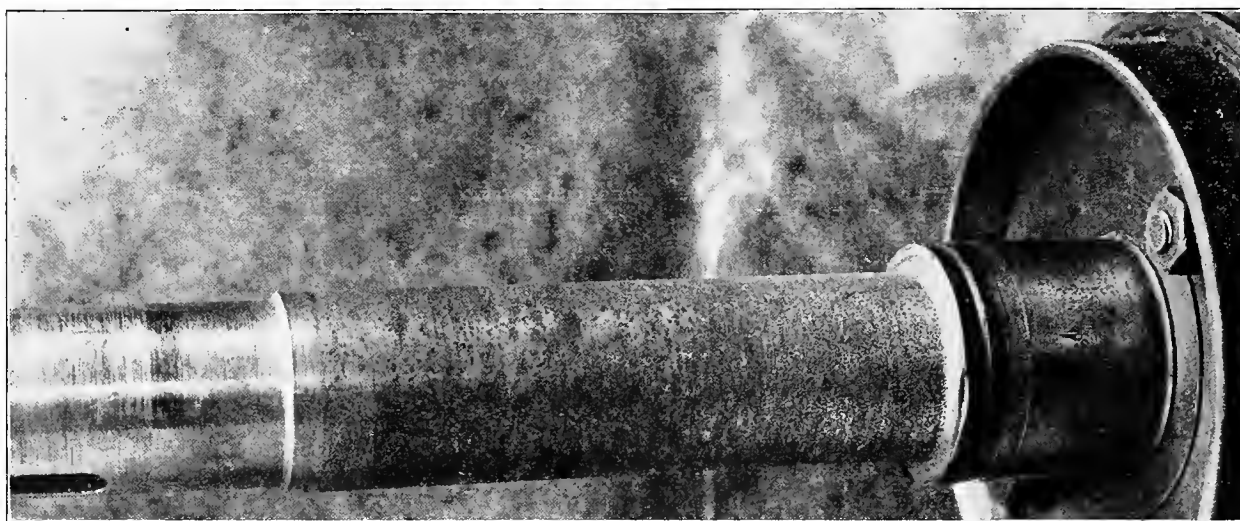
Shaft, showing Excessive Pitting and Scarring Caused by Bearing Currents at Starting
